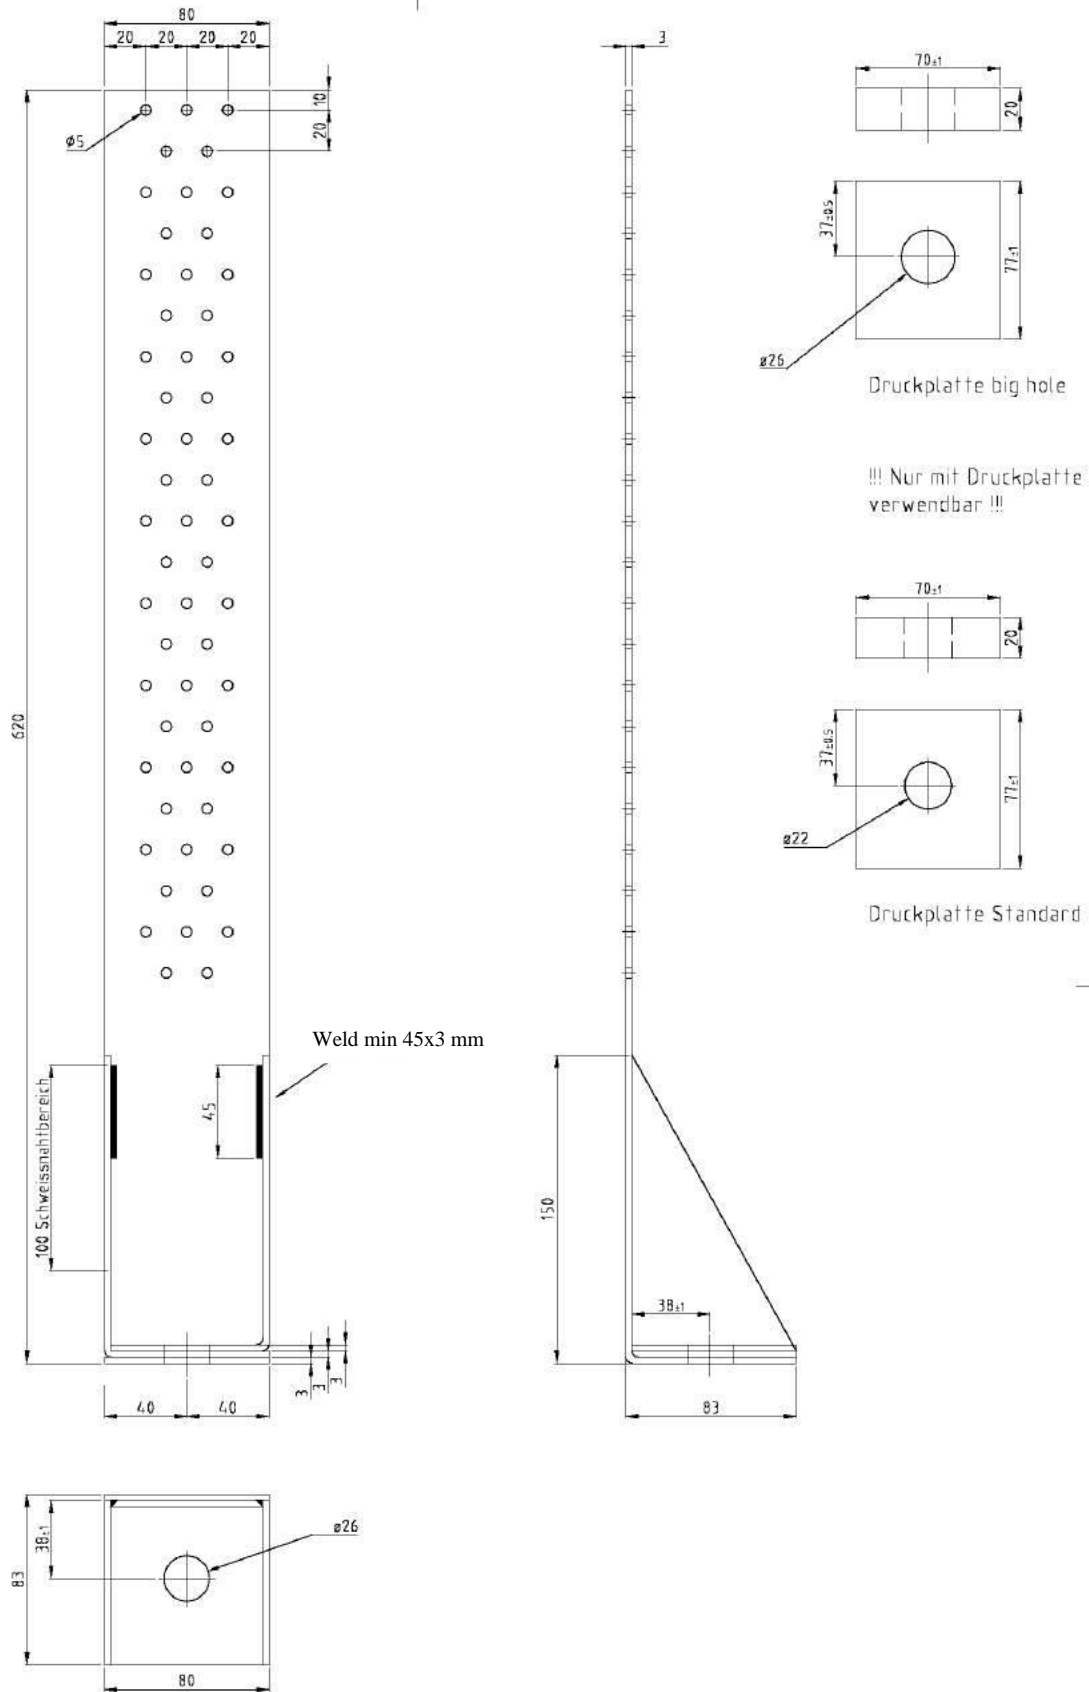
Dimensions of type WHT620 Big hole (with washer 77x70x20xØ22 or 77x70x20xØ26)
